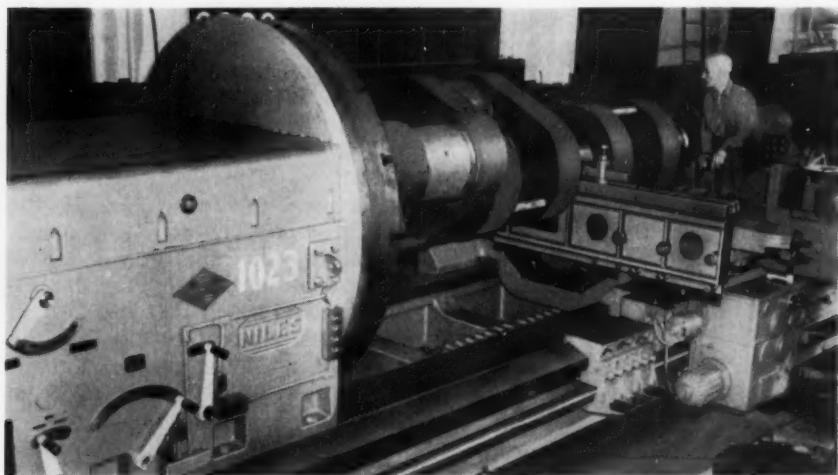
The 90-inch lathe used in the Maryland Drydock shop is also built with a removable filler slide plate which can be removed from the carriage bridge to obtain increased
